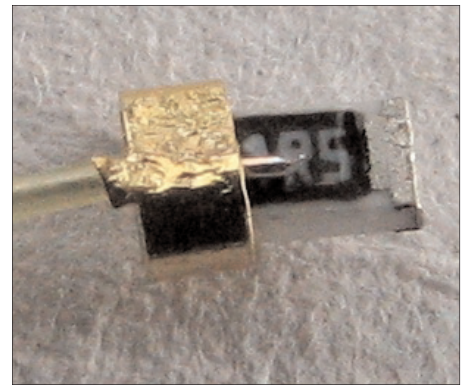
A crimp tube used to connect to a 1206 SM package, ready for a dab of solder.
